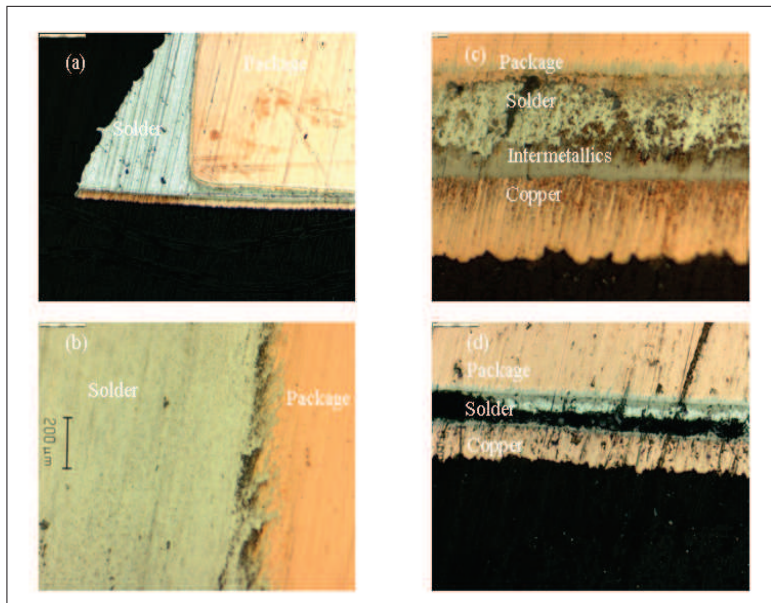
Solder's (SnPb) microstructure, (a) At the end of the package, (b) No crack is observed in the interfacial layer, (c) An intermetallic layer has been formed between solder and copper, (d) A big crack has been formed through the solder under package.
